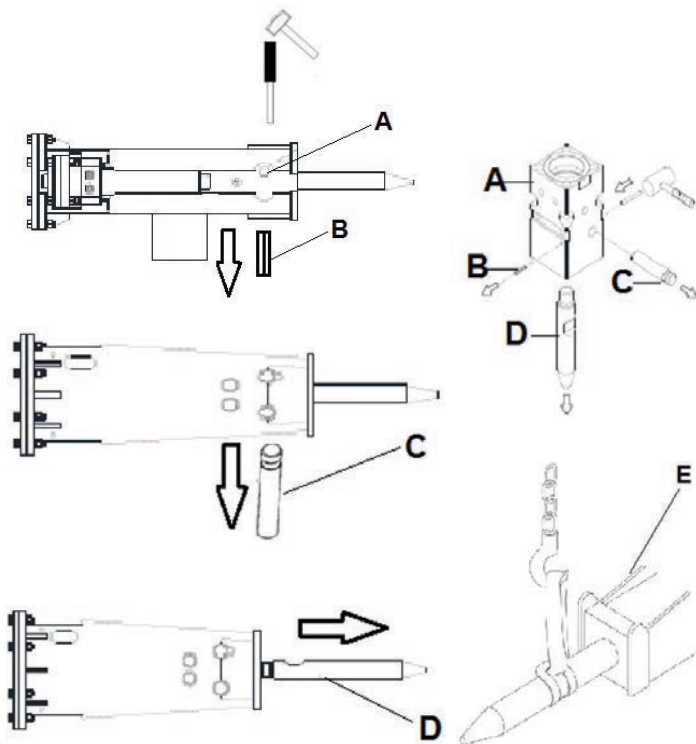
CH65/CH65H/CH70EX/CH70SS Breaker Tool Removal
